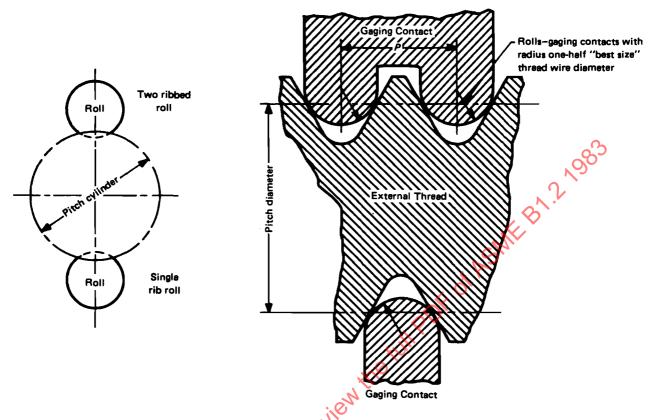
THREAD SNAP GAGES -- MINIMUM-MATERIAL THREAD GROOVE DIAMETER LIMIT
